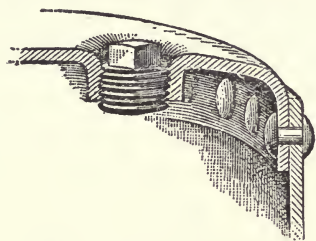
Plug Inserted to Repair Leak in Boiler.
